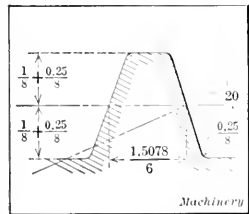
Hob Tooth for a 6/8 Pitch Fellows System Stub Gear Tooth
